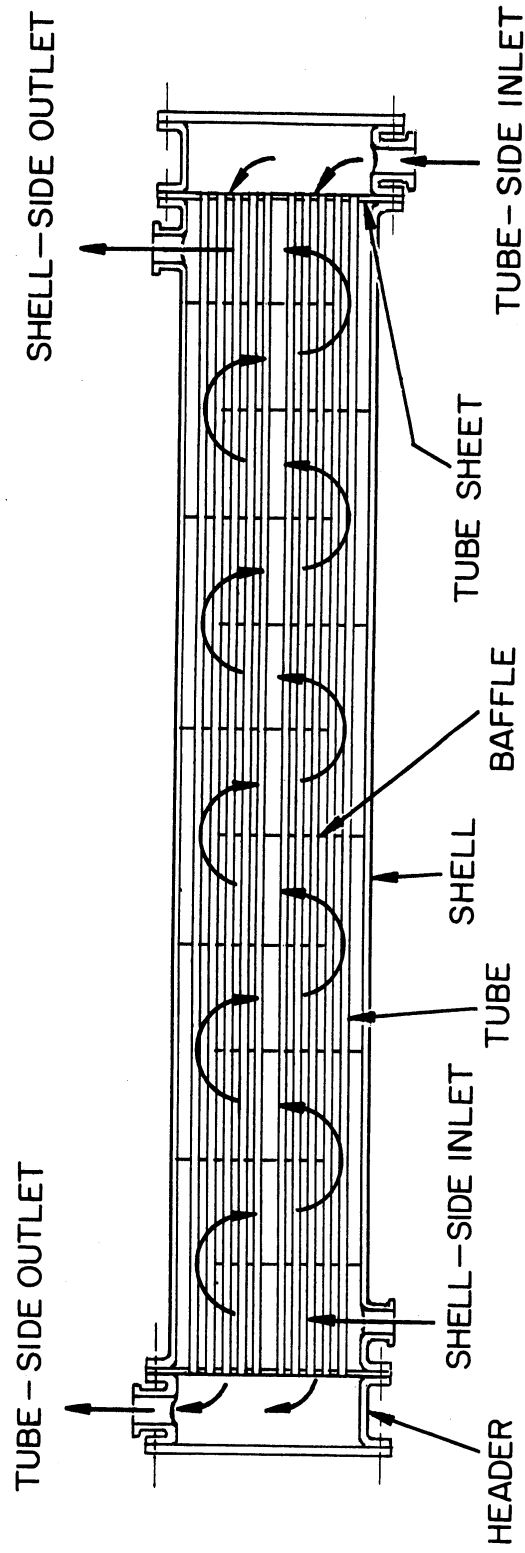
Typical shell-and-tube heat exchanger, (Rigid - tube sheet type)
